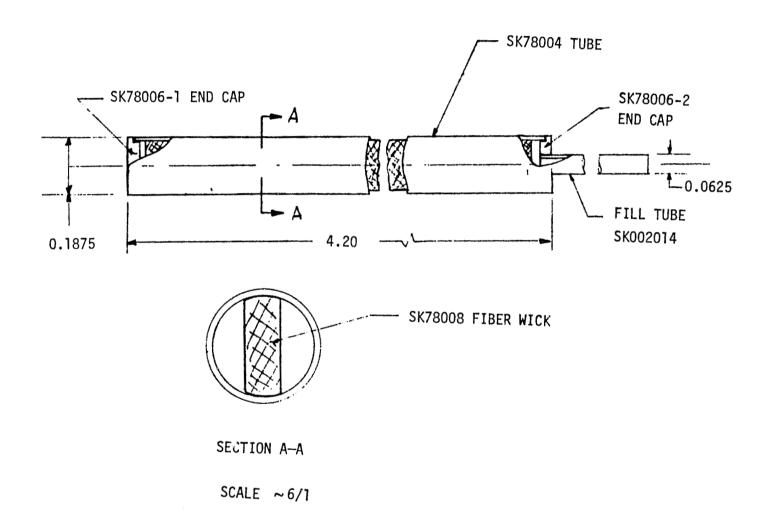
HEAT PIPE COOLED MAGNETIC - INDUCTOR HEAT PIPE ASSEMBLY
